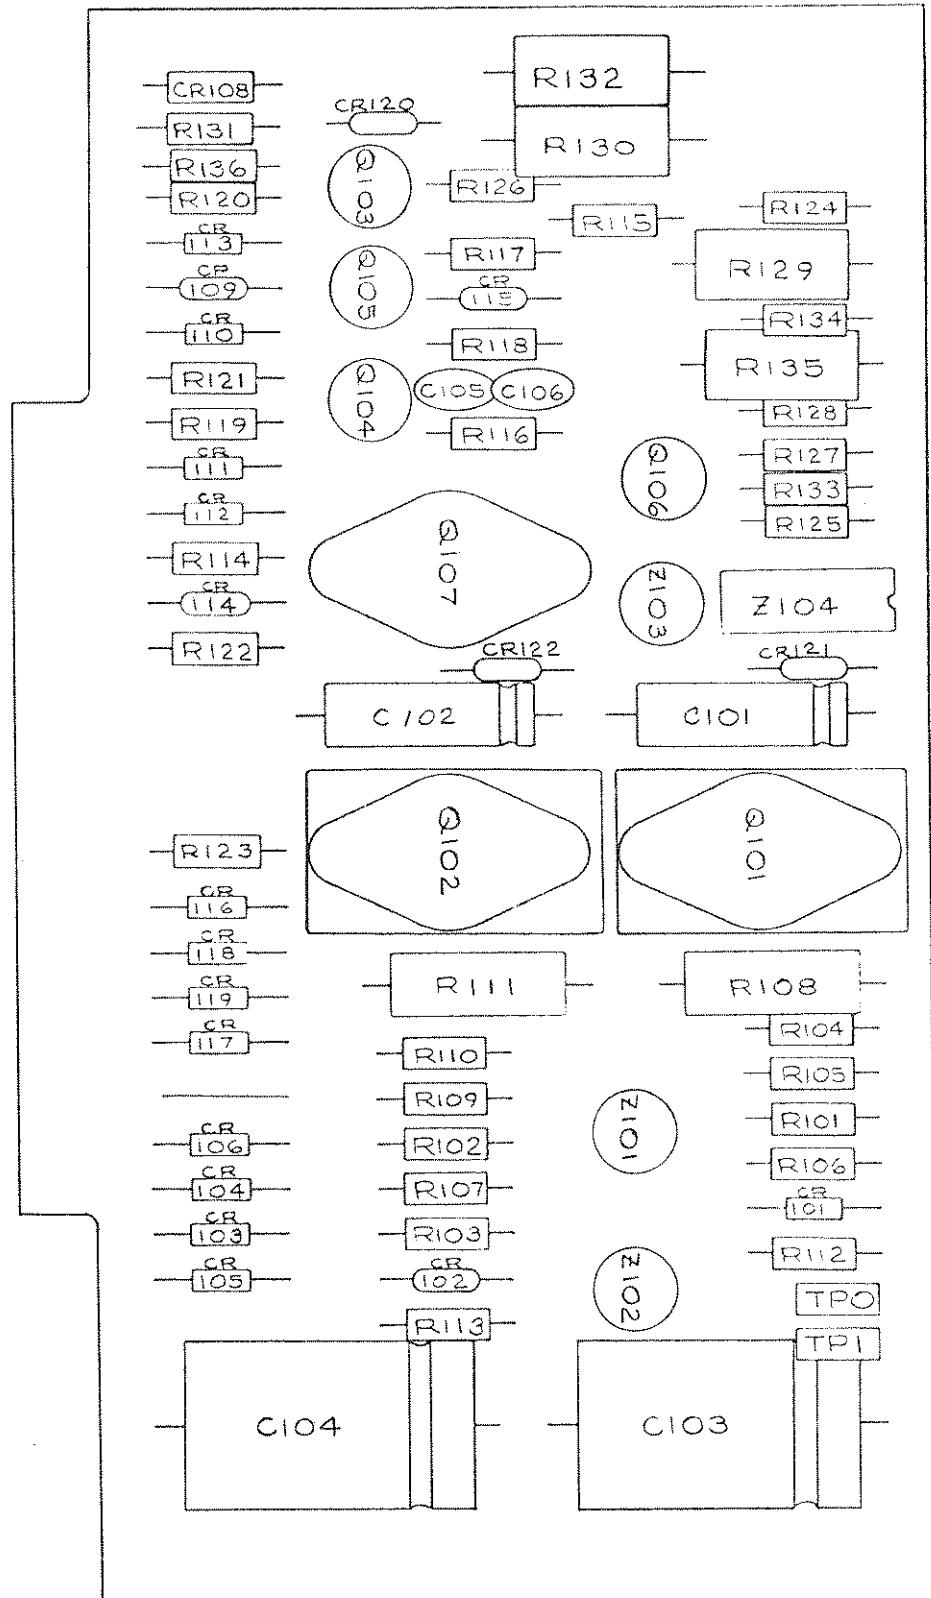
POWER SUPPLY BOARD ASSEMBLY
